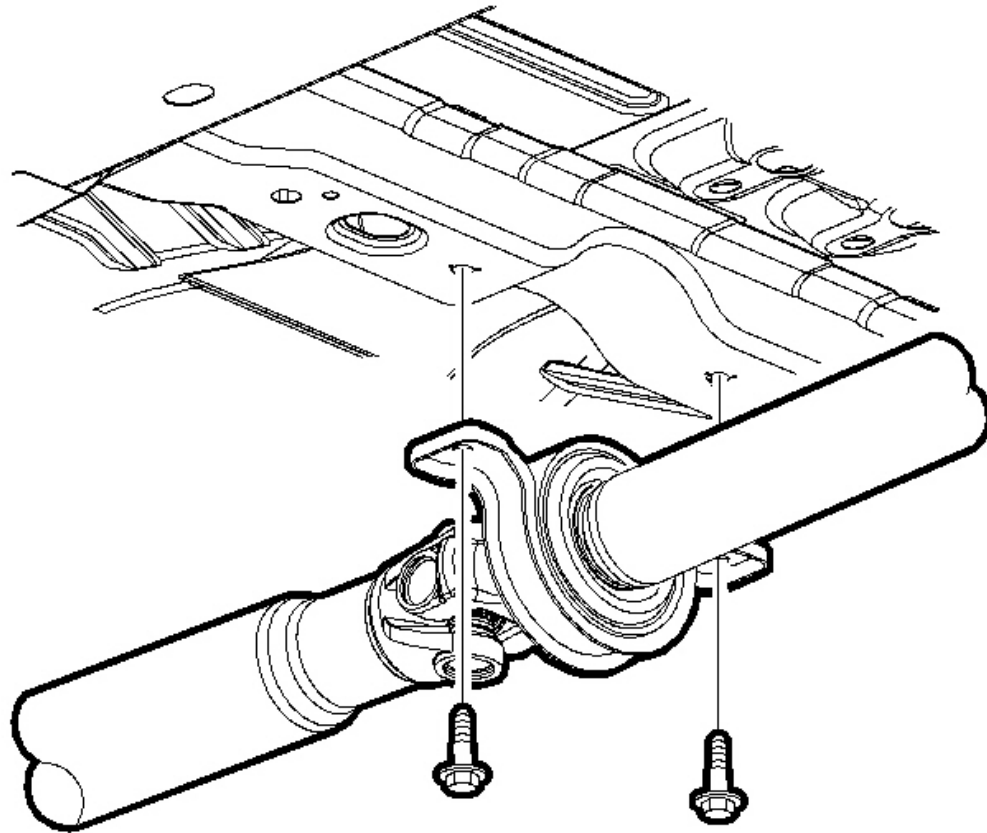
Installing Support Bearing Retainer Bolts On The Vehicle Underbody
